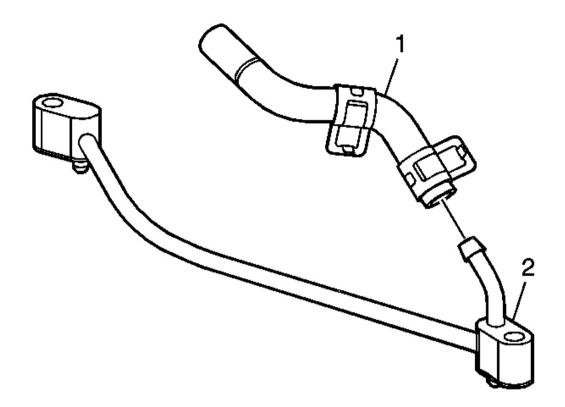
Coolant Air Bleed Hose & Pipe Courtesy of GENERAL MOTORS CORP.
